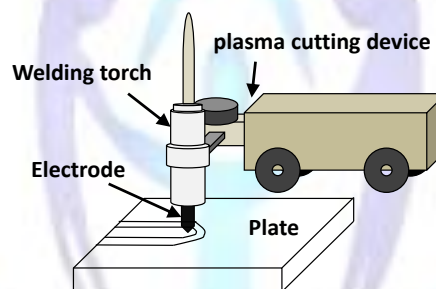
Adaptation of the welding torch to the plasma cutting device
